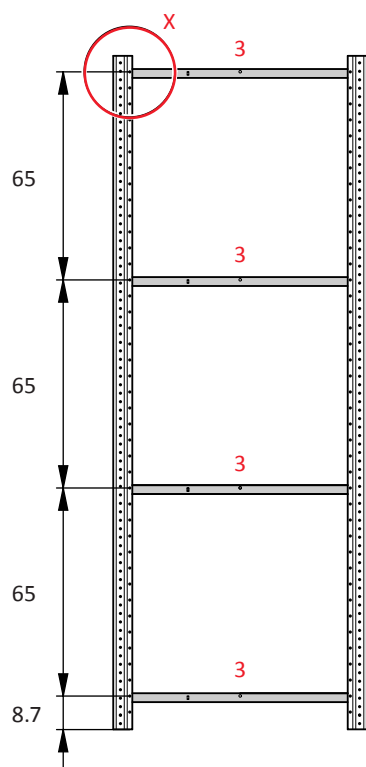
Installing the horizontal struts. (The opening must face downwards!).
